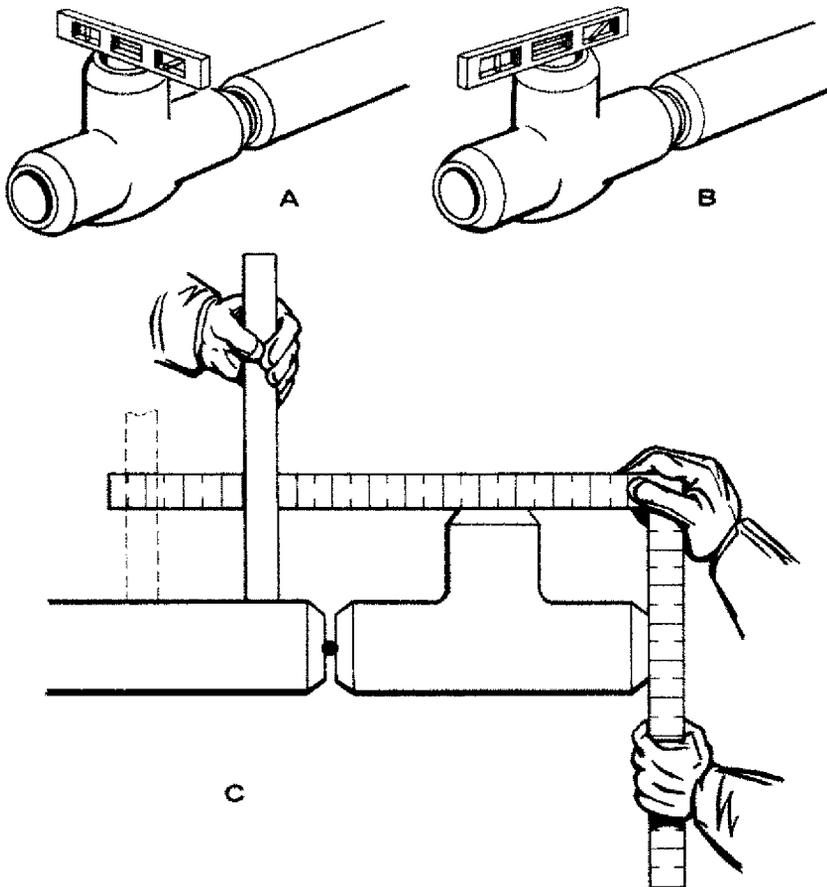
A. Aligning a tee prior to depositing the first tack weld; B. Aligning the tee prior to depositing the second tack weld; and C. Alternate method of aligning the tee.
